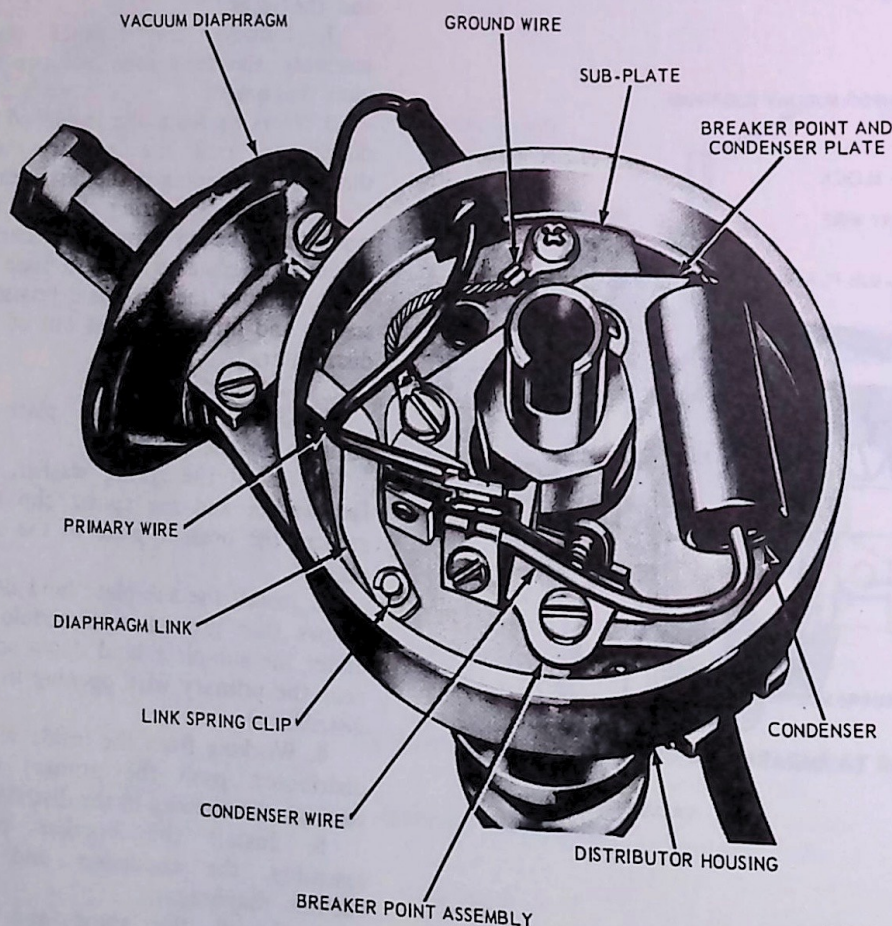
Breaker Plate Installed—V-8 Engine Single Diaphragm Distributor
